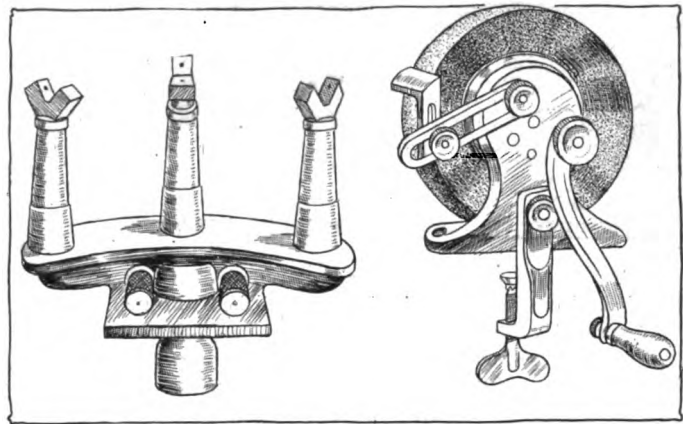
Tri-Radiant acetylene burner. Fig. 5—Dimo-Grit tool grinder for touring use
